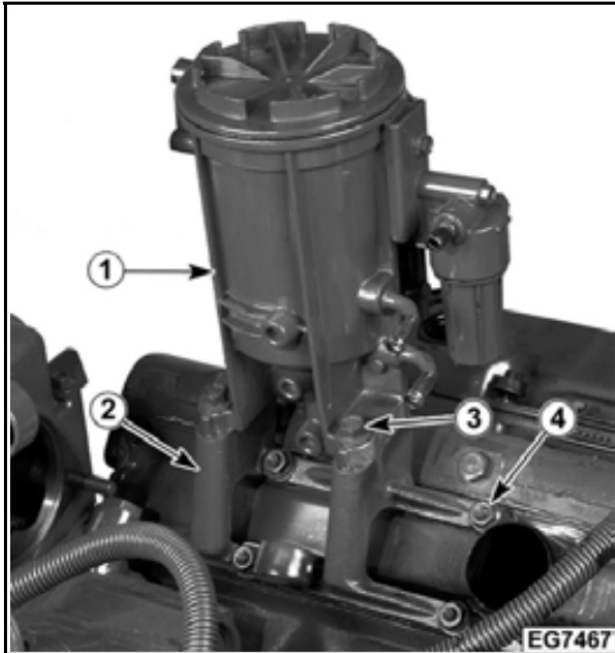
Removing the Fuel Filter Tower (Model Year 1997–1998)
